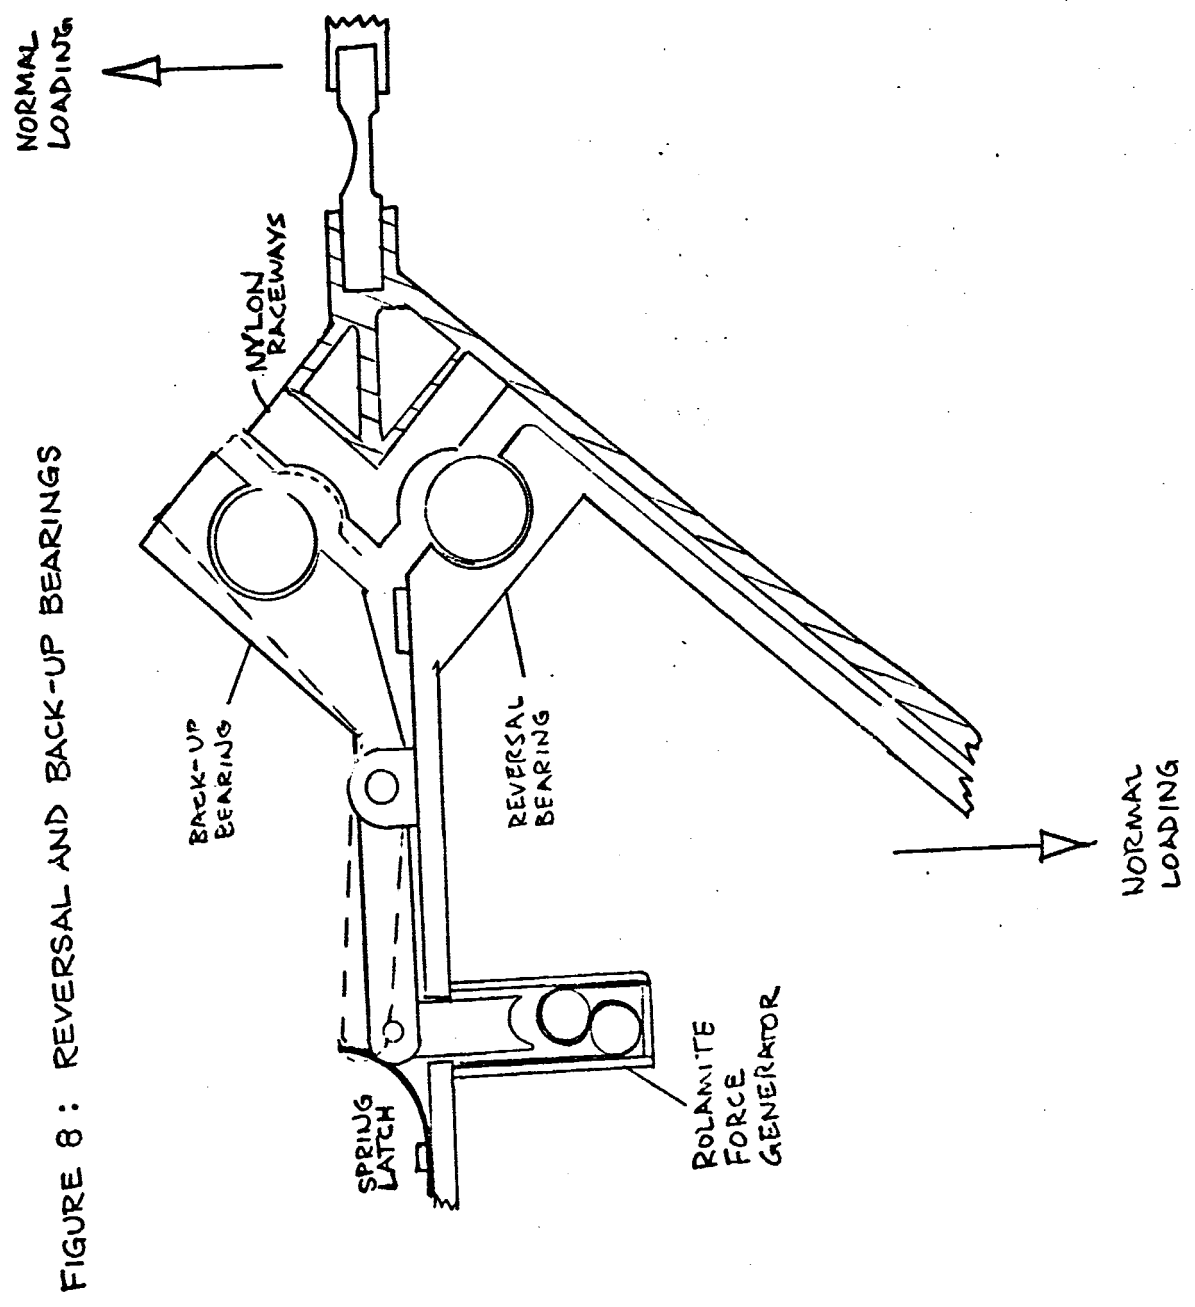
REVERSAL AND BACK-UP BEARINGS
